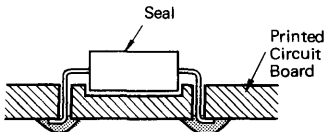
Mounting by Seating Transistor on Shallow Hole on Printed Circuit Board
